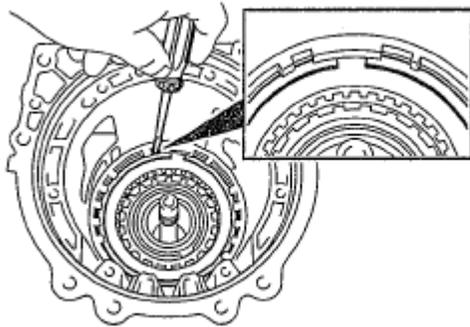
Identifying Thrust Washer And F2 One-Way Clutch Component On Clutch Drum Component
